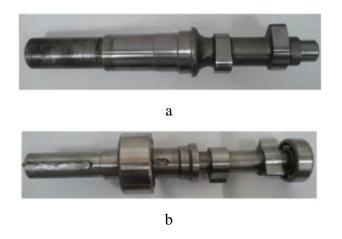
Cam Shaft: (a) Four-Stroke Camshaft, (b) Six-Stroke Camshaft
